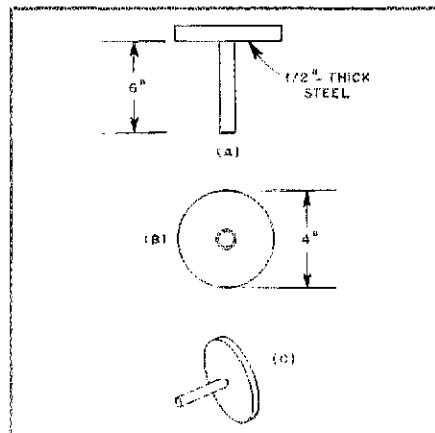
A side view (A), bottom view (B) and oblique view (C) of the ground-rod driving cap.
